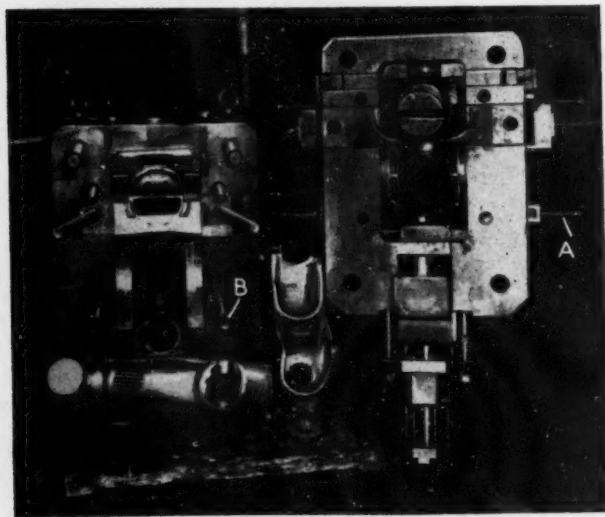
In this Die, Castings for the Front Casing of the Scooter Shown in Fig. 3 are Produced. A Loose Piece is Employed in the Moving Half of the Die for Coring the Interior of the Shrouded Headlamp Housing
